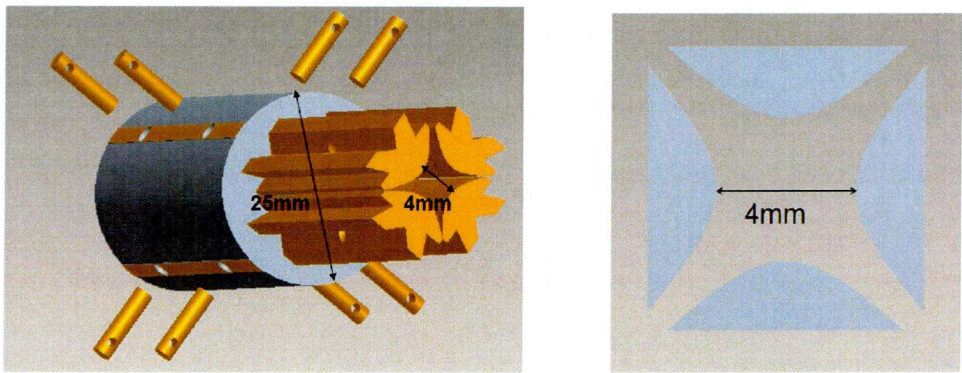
PRO/ENGINEER CAD design drawing for the hyperbolic DLP QMF showing the design for the electrode grooves and housing and complete assembly of the QMF with conducting and securing
